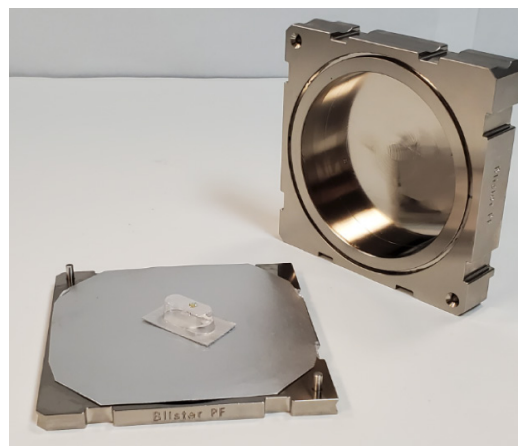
Pre-filled Blister Packs inside the Carrier Gas chamber
